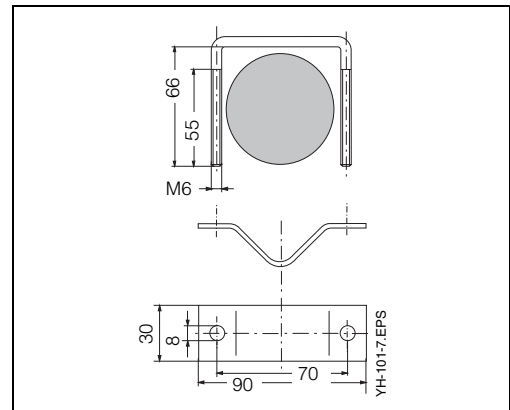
Weather protection cover CYH 101 with dimensions and mounting positions for:
